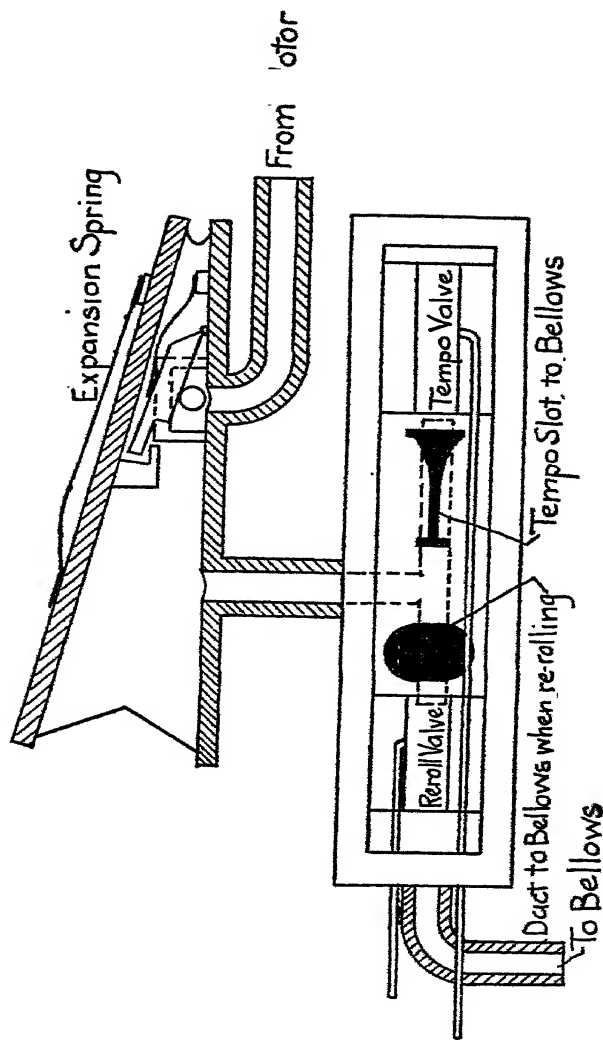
MOTOR VALVE BOX WITH AUXILIARY EQUALIZER
